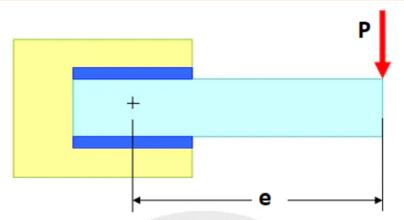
Eccentric loaded weld joint - Type I
